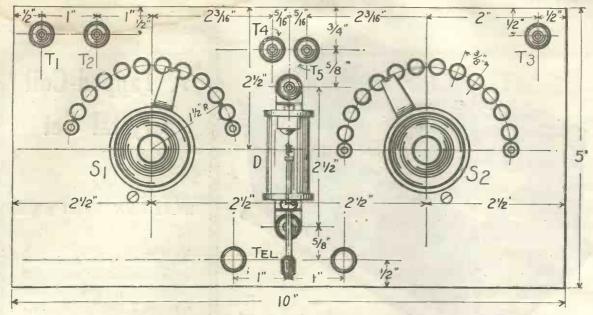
Dimensioned plan of the panel from which drilling may easily be carried out.
